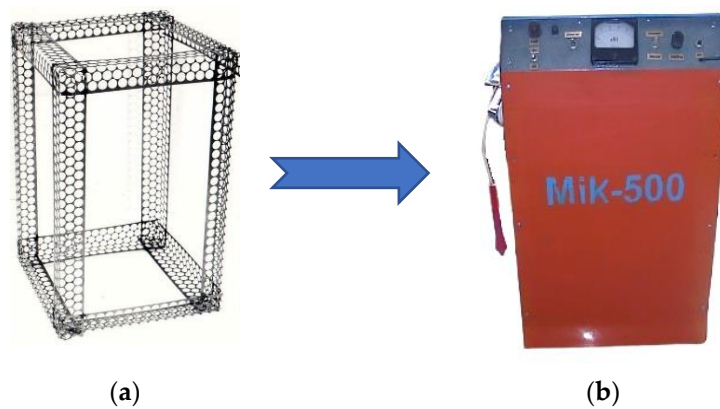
Prismatic frame made of angle-type steel PP (a), the device with steel sheet cladding (b) [44].
